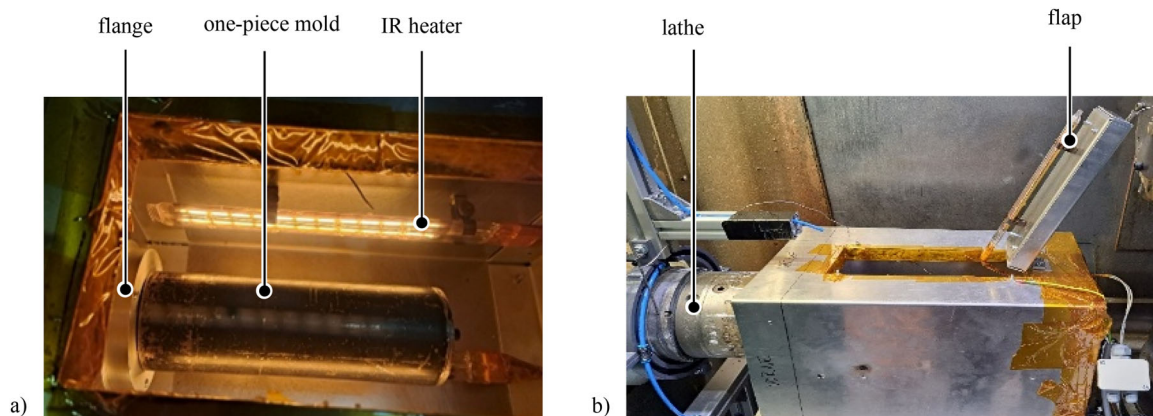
Inside of the heat chamber with flange, tool and one of the four infrared heaters(a); Integration of the heat chamber into the turning center (b).
